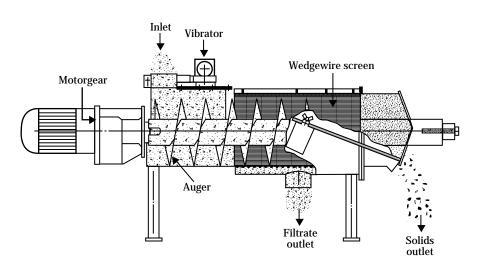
Screw-press type, cylinder separator (courtesy of Fan Engineering USA, Inc.)
